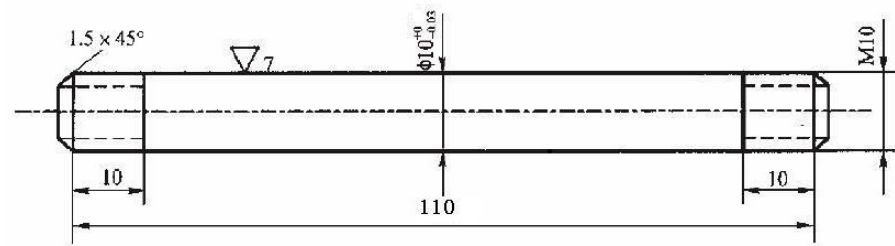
Dimensions (mm) of high-temperature tensile specimens.
